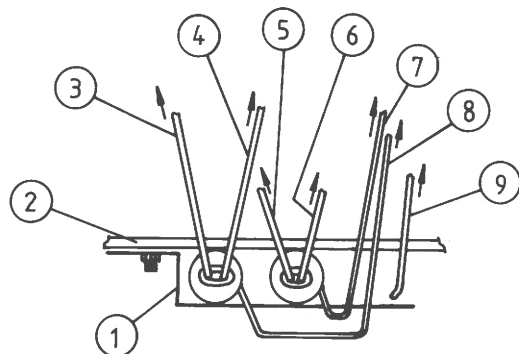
FRONT PANEL ASSEMBLY TERMINAL WIRING
